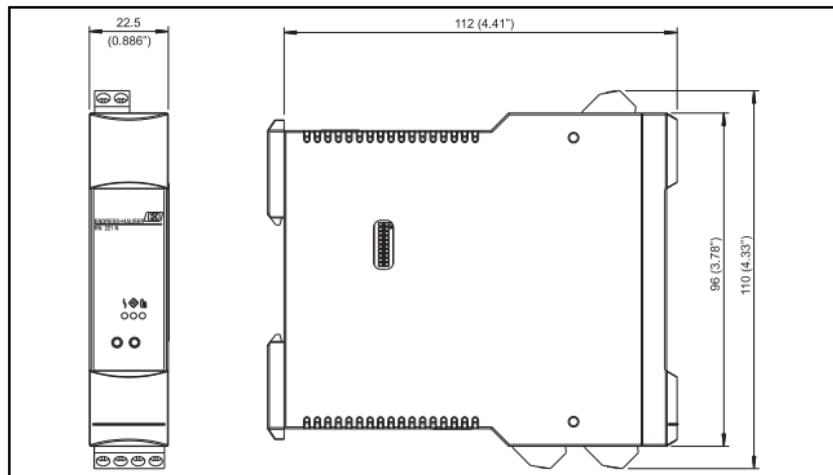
Dimensions in mm (dimensions in inches in brackets)
